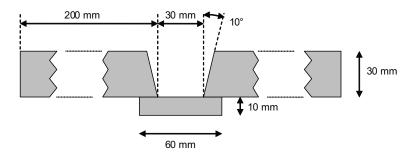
Geometry of the Weld Joint to be Used for the Screening Test Coupon
